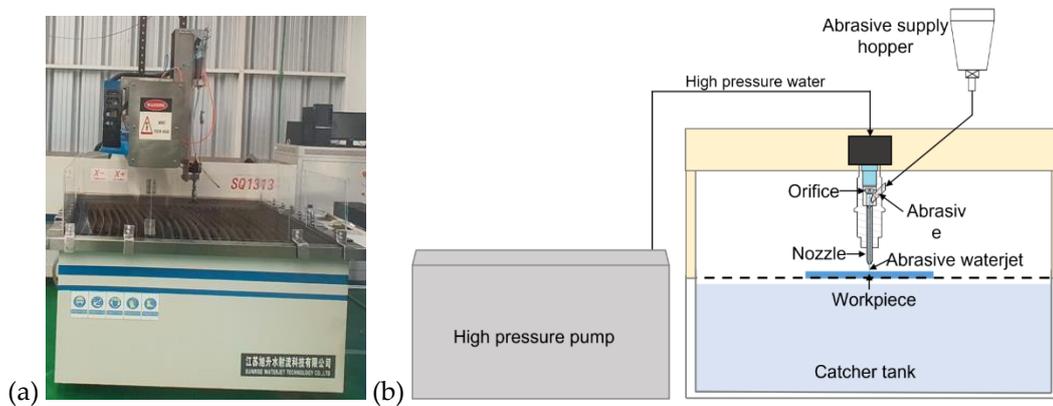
(a) an AWJ machine and (b) an AWJ machining system.
